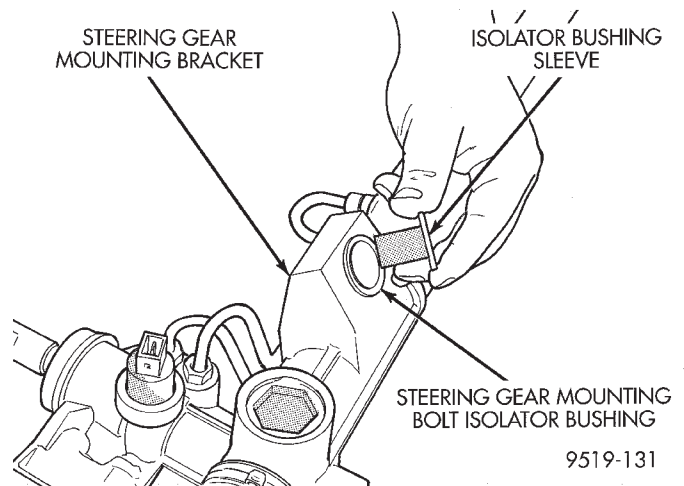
Mounting Bolt Isolator Sleeve Installation
